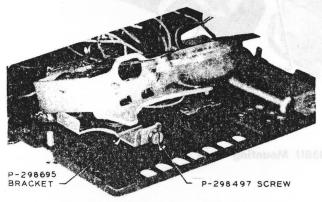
Ringer Assembly Using P-298695 Bracket
